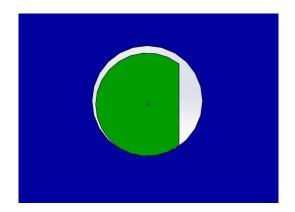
Not coaxial: drive shaft rests on bottom of hole when clearance too large.
